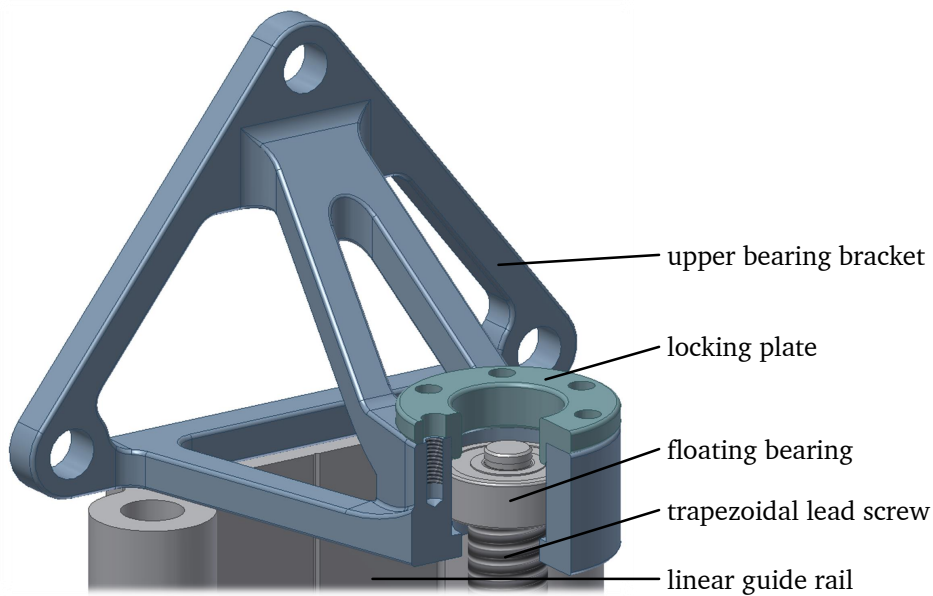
Cutaway CAD model of upper bearing bracket with locking plate
